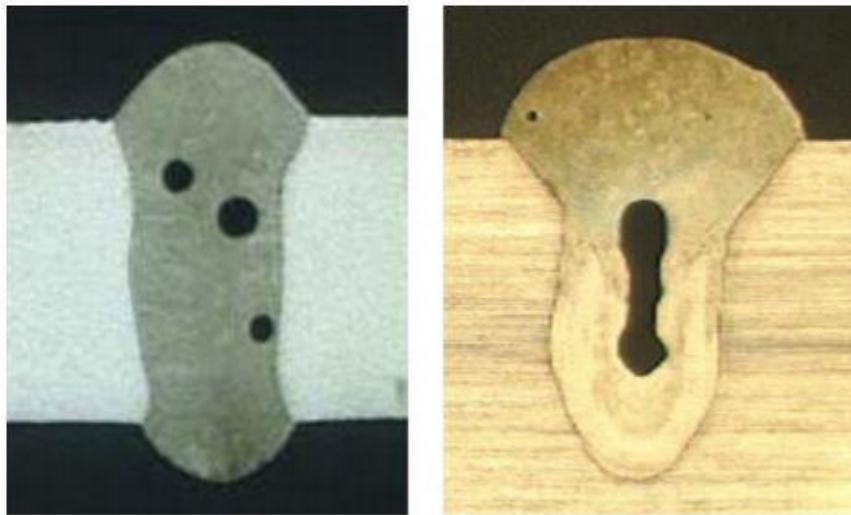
Examples of porosity formation in laser beam welding of Al-Li alloys [47].
